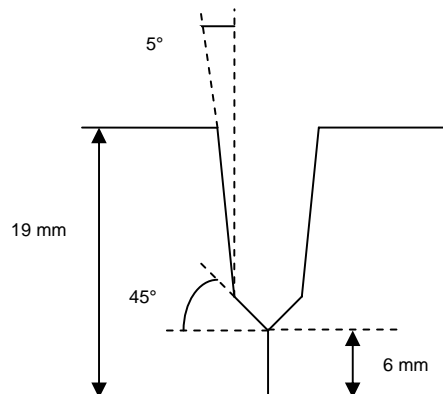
Weld preparation for laser root/ GMAW fill welds in X100 plate
